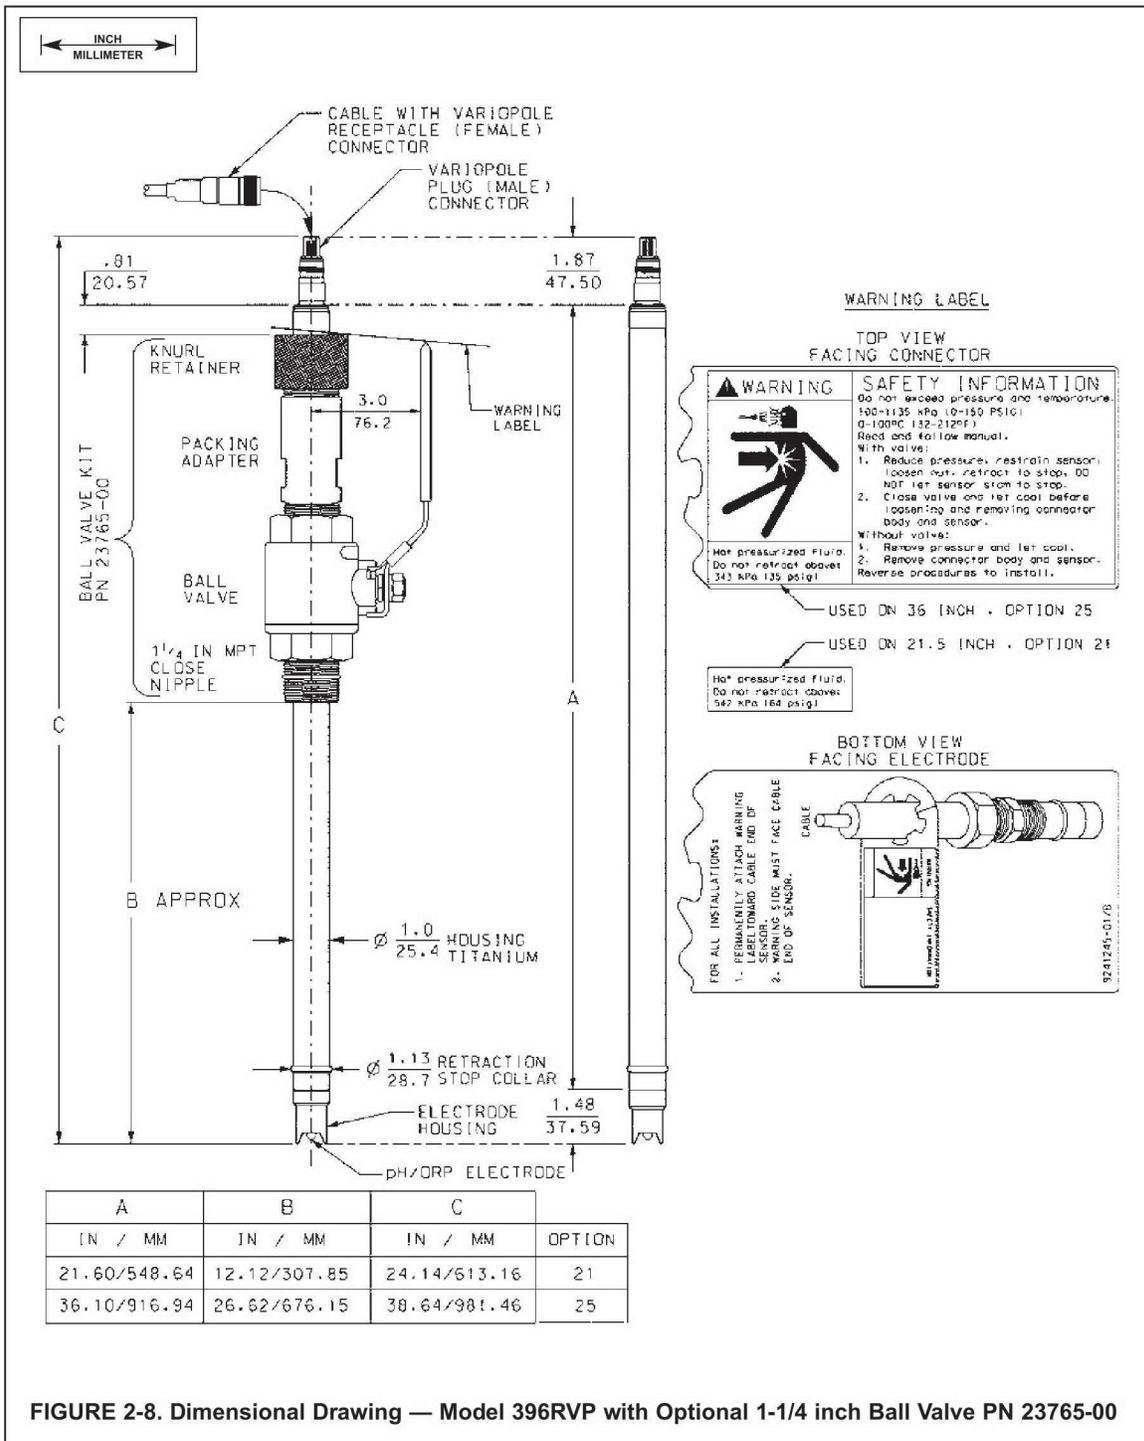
Dimensional Drawing — Model 396RVP with Optional 1-1/4 inch Ball Valve PN 23765-00
